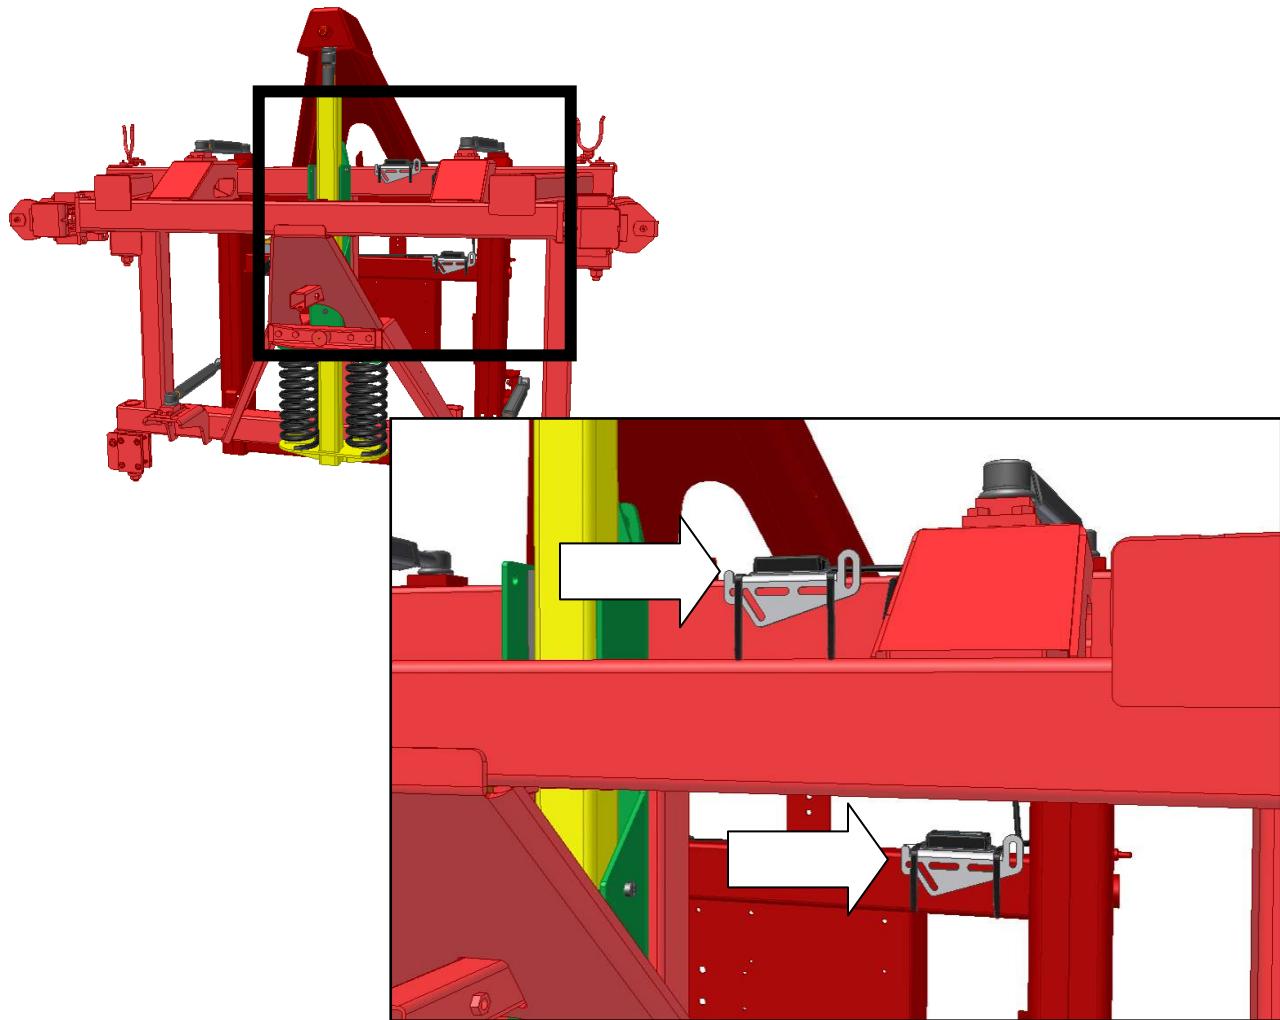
Boom Roll Sensor Mounting (viewed from rear of sprayer)
